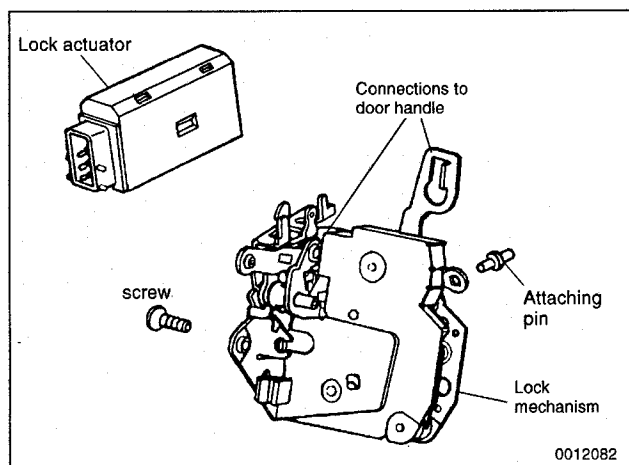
Front door lock mechanism and related parts. Rear lock mechanism is similar.
